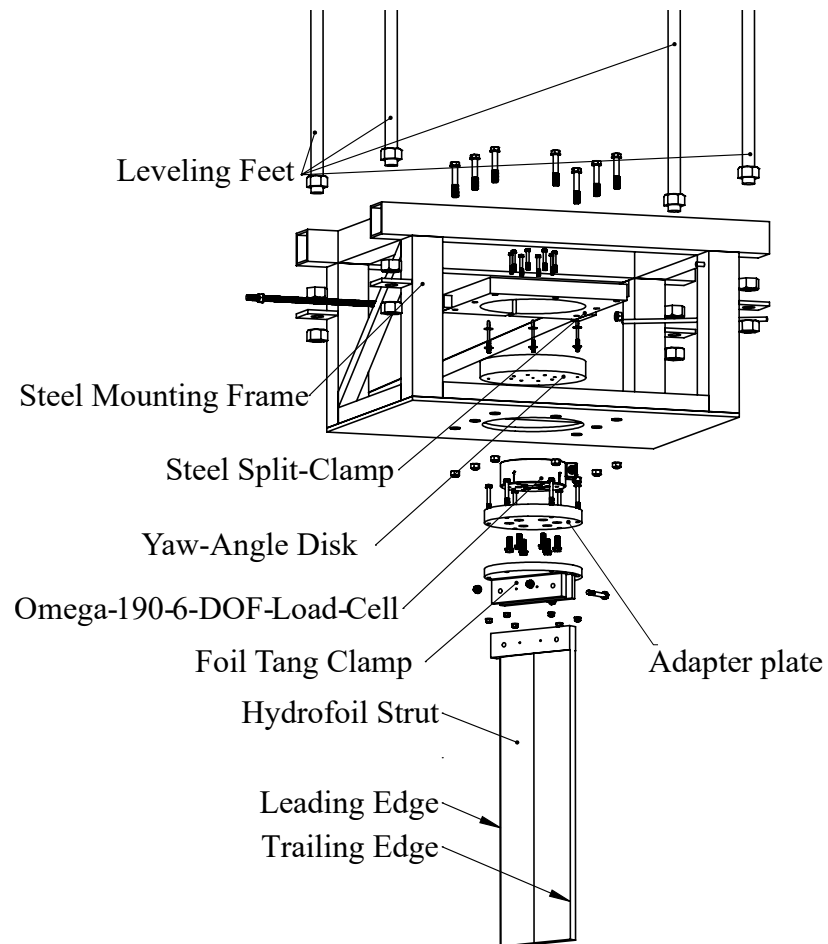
Exploded view of experimental setup. Dimensions are in inches.
